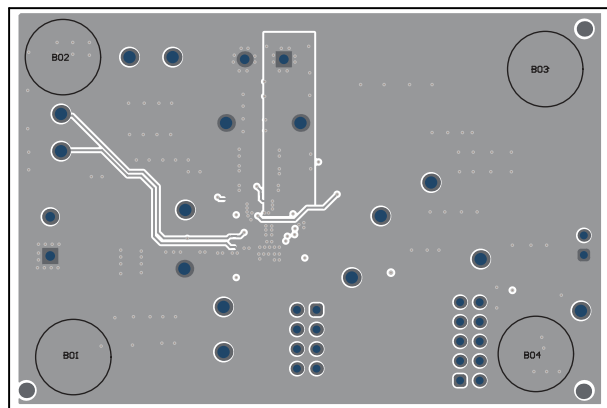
Bottom-Side Composite View (Viewed From Bottom)
